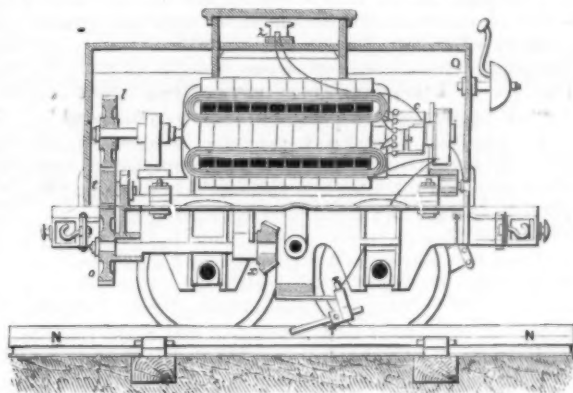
LONGITUDINAL SECTION OF MOTOR.
